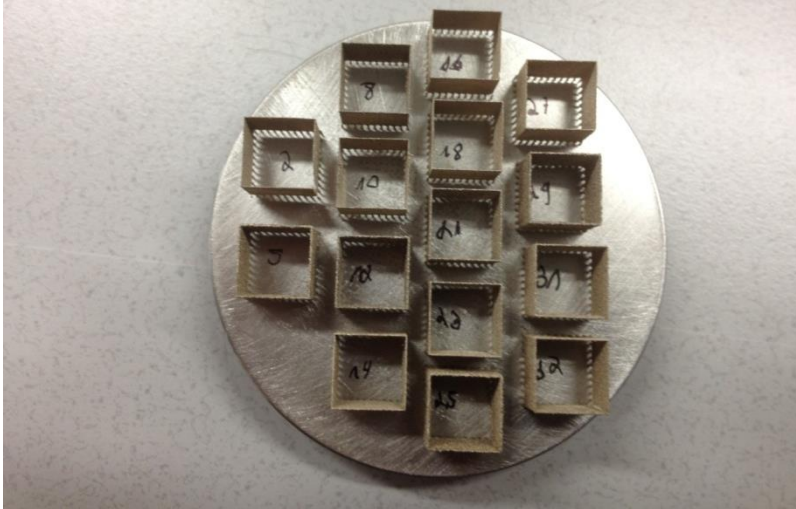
Example of manufactured parts after cleaning, test series 1, 30 μm layer thickness
